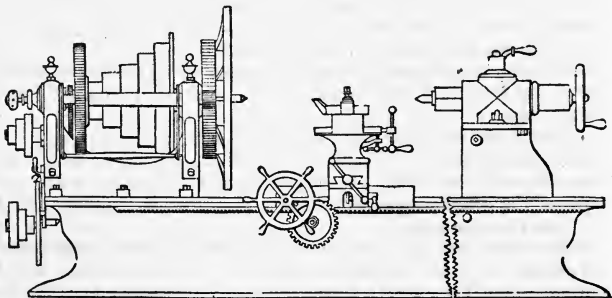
is an engine lathe manufactured at the Lowell Machine Shop, Lowell, Massachusetts. Its swing is 50 inches over the sills, and 32 over the rest.
